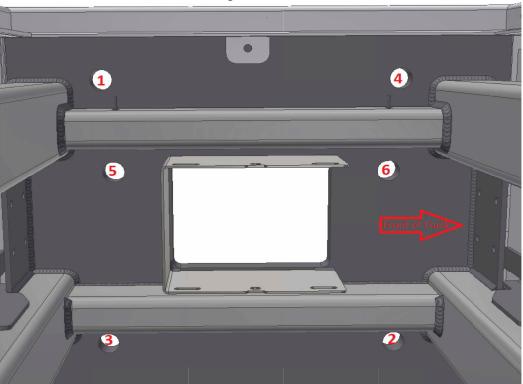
Marking Bolt Heads Prior to Torque Check
